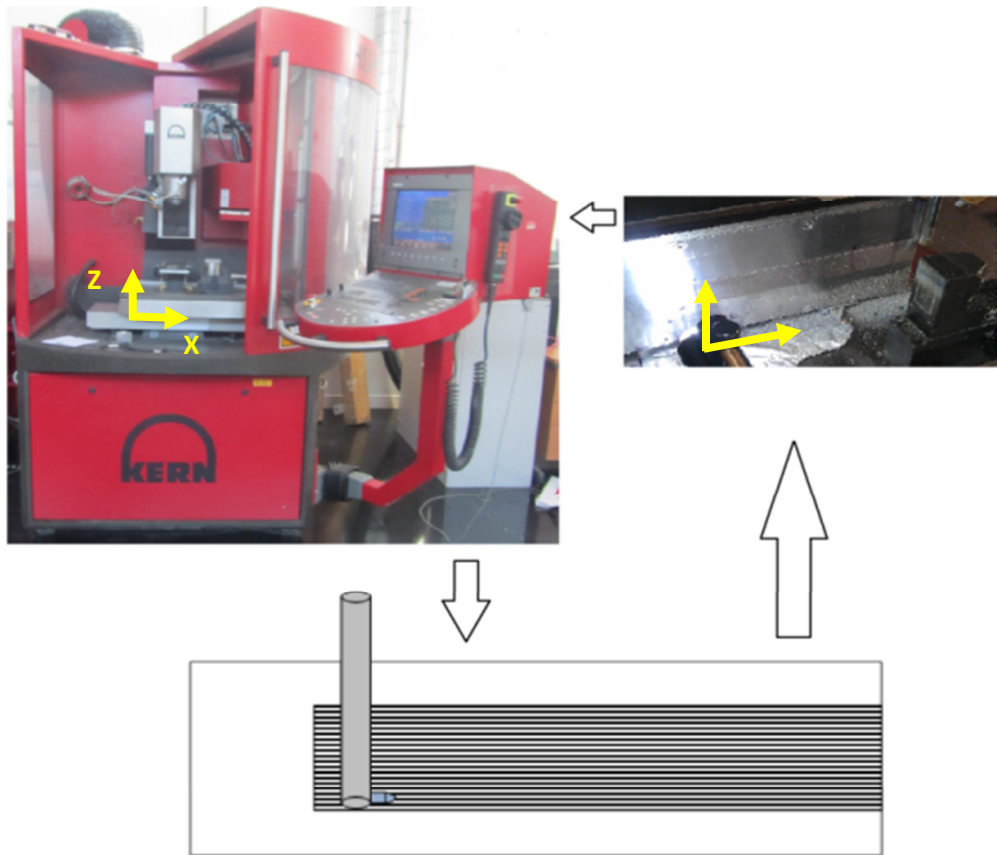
Micro-milling machine, workpiece and diagram of machining set-up
